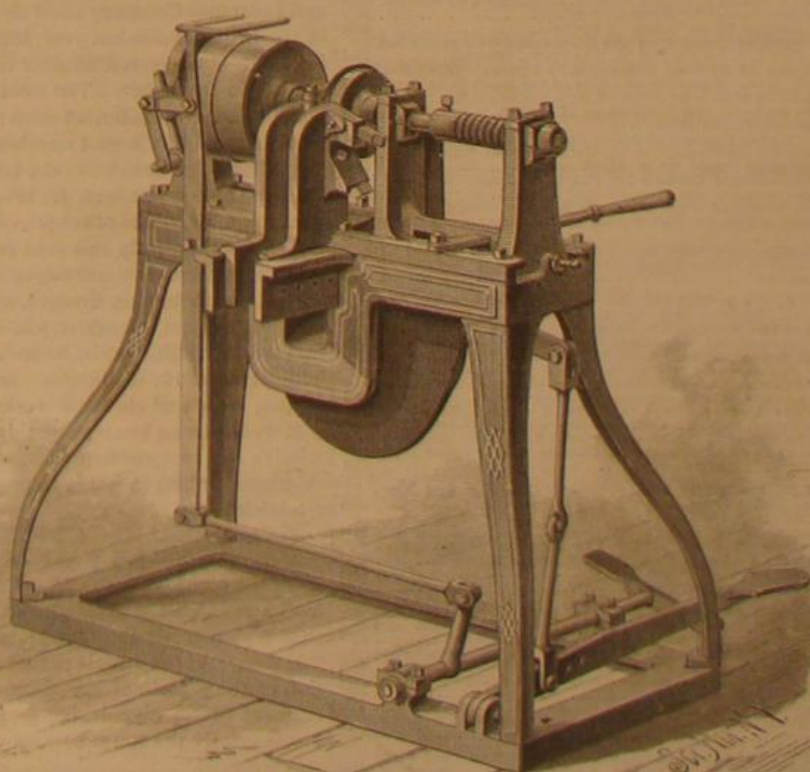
MACHINE FOR TURNING THE HEADS OF KEGS.
